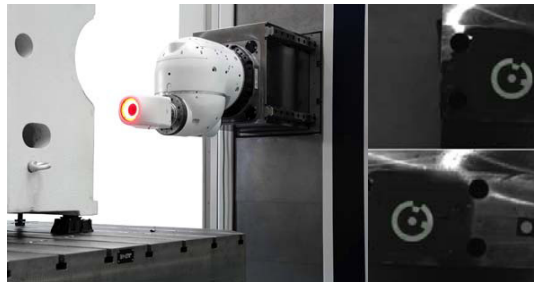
Spindle integrated stereophotogrammetric solution. In-machine measuring of type B raw part location and alignment (left), and reference target photographs (right).
